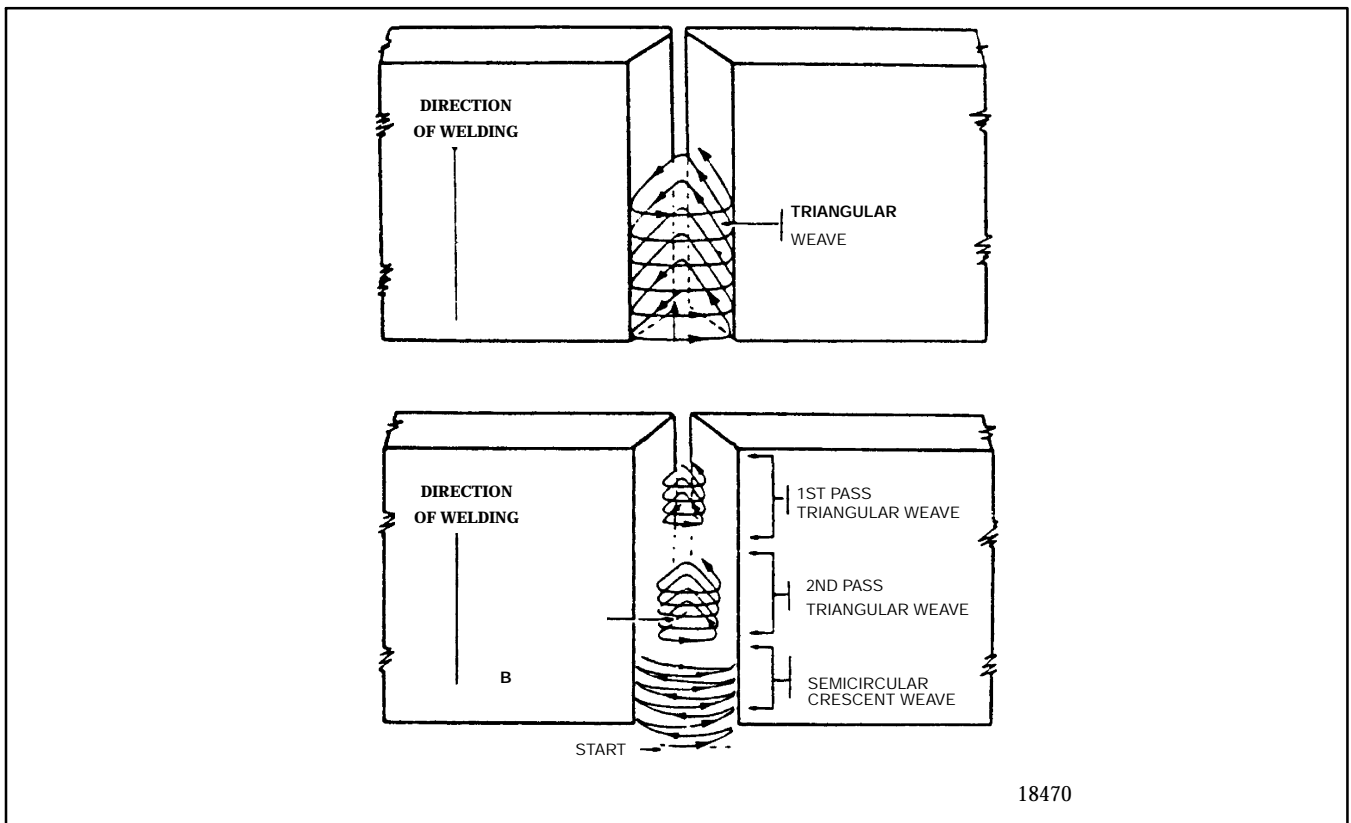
Welding Butt Joint in Vertical Position
